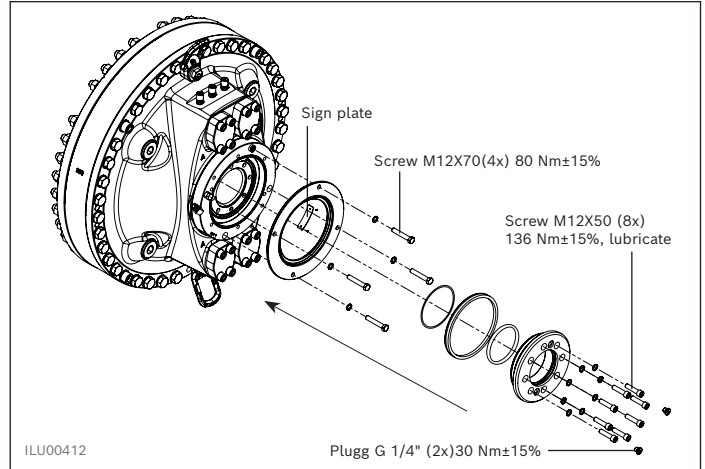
Outer ring, sign plate and SPDC magnetized bearing holder
